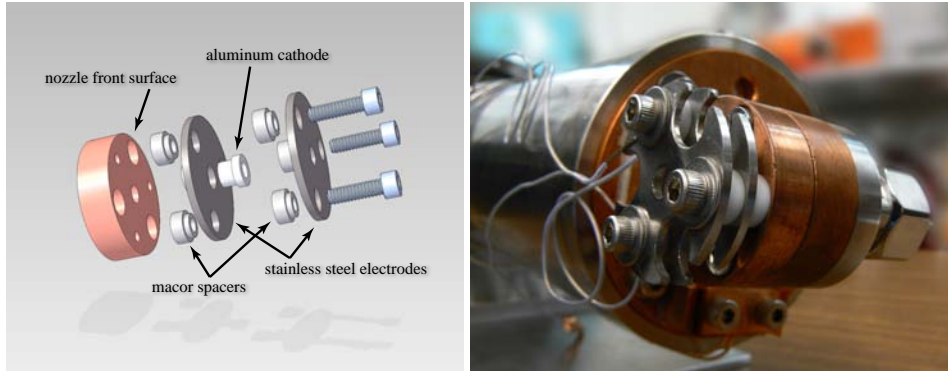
Schematic of the discharge mounted on the front face of the nozzle (*left*) and photograph of the assembly (*right*).
